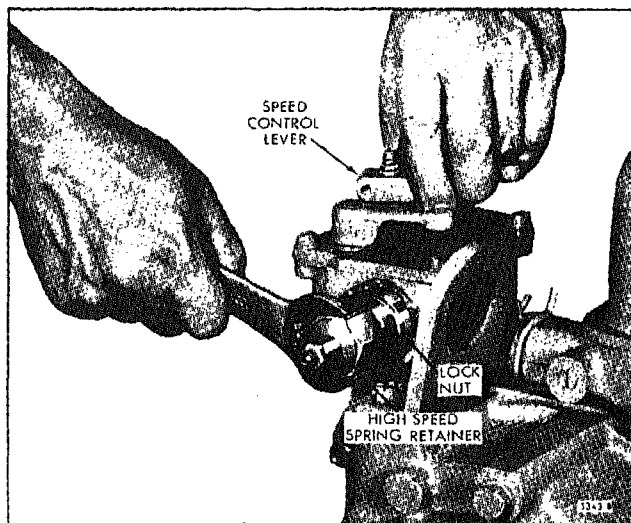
Adjusting Maximum No-Load Engine Speed
